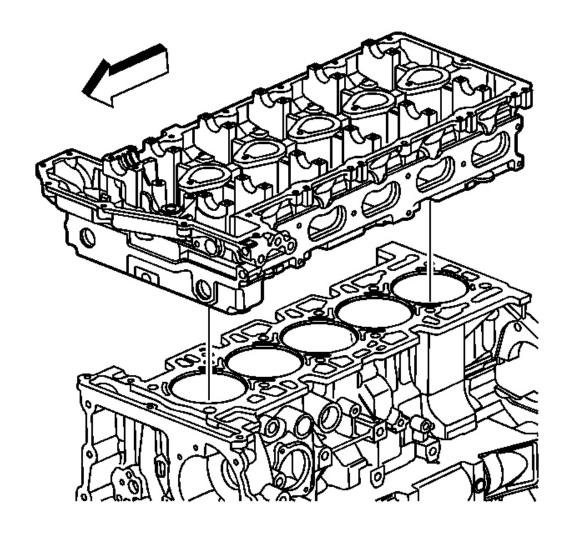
View Of Cylinder Head Courtesy of GENERAL MOTORS CORP.
